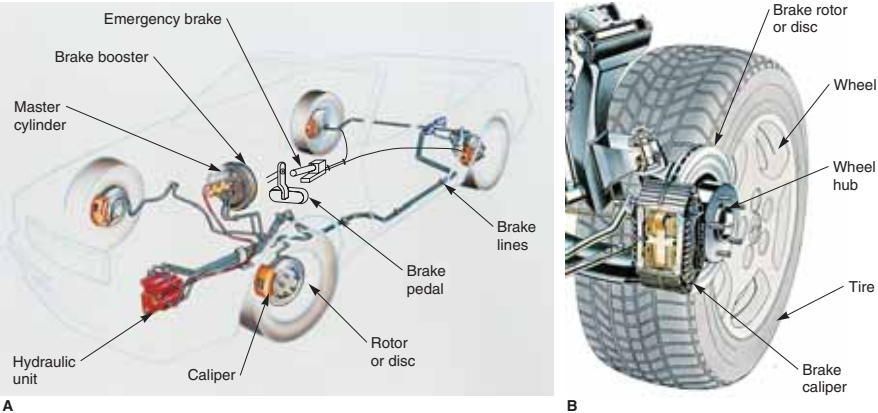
When the brake pedal is pressed, pressure is placed on a confined fluid. The fluid pressure transfers through the system to operate the brakes. An emergency brake is a mechanical system that applies the rear wheel brakes. A—Complete system. B—Close-up. (Cadillac, Nissan)
